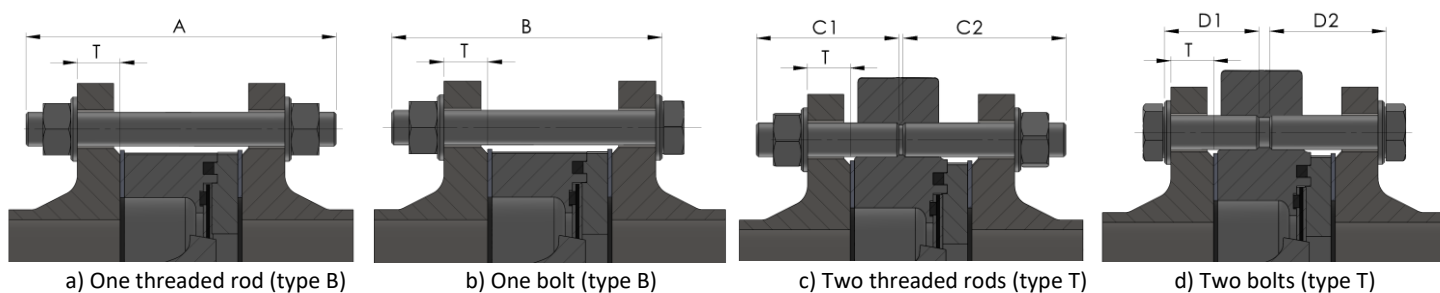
Dimensions of fasteners for valves DN50-DN600 with type B and T bodies
